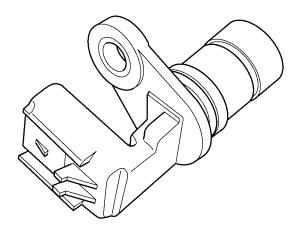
CRANKSHAFT POSITION SENSOR - 2.4 L TURBO
